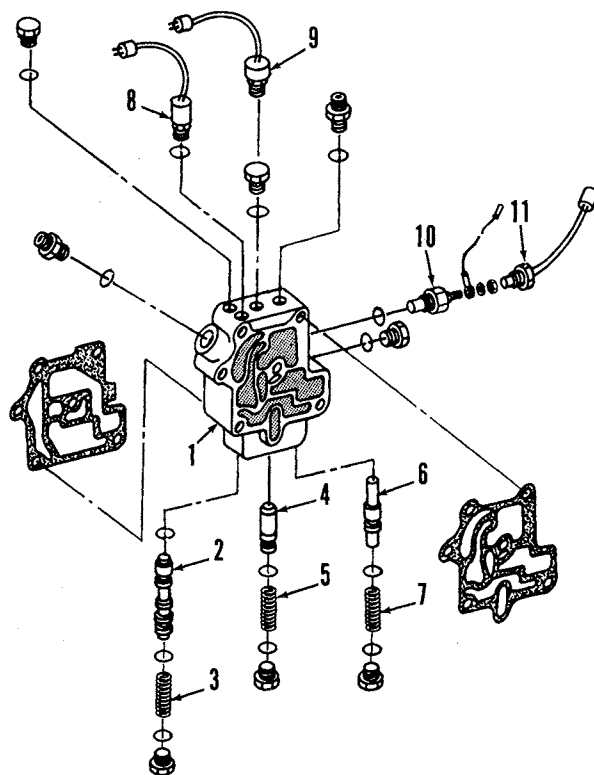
Exploded view of return oil filter relief valve housing and components used on Quad-Range models.
